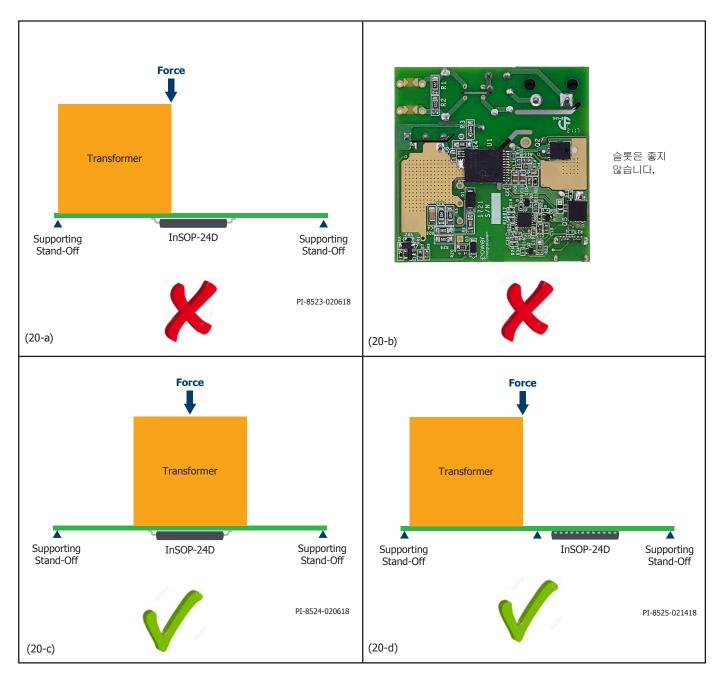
Recommended Position of InSOP-24D Package Shown with Check Mark.
